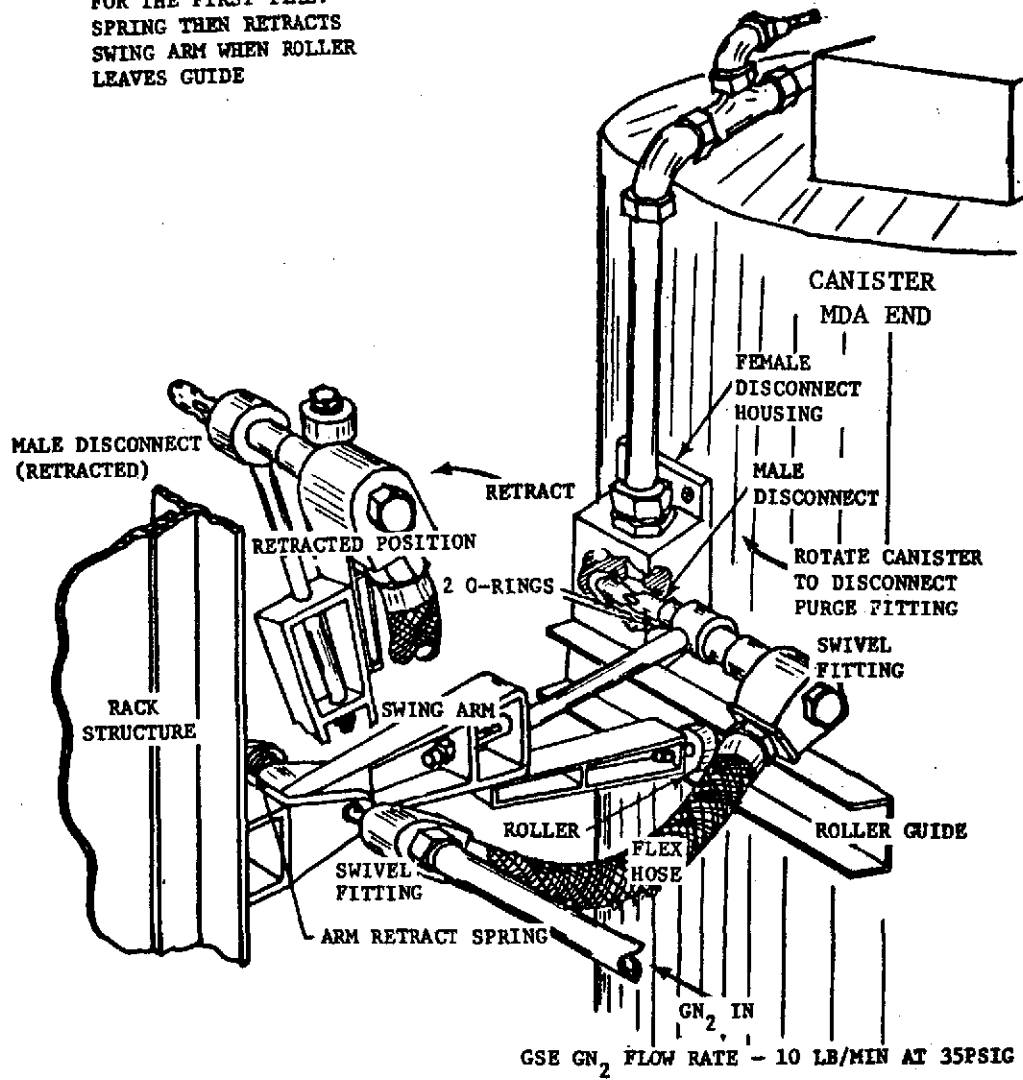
GN₂ Purge Fitting Retract Mechanism
